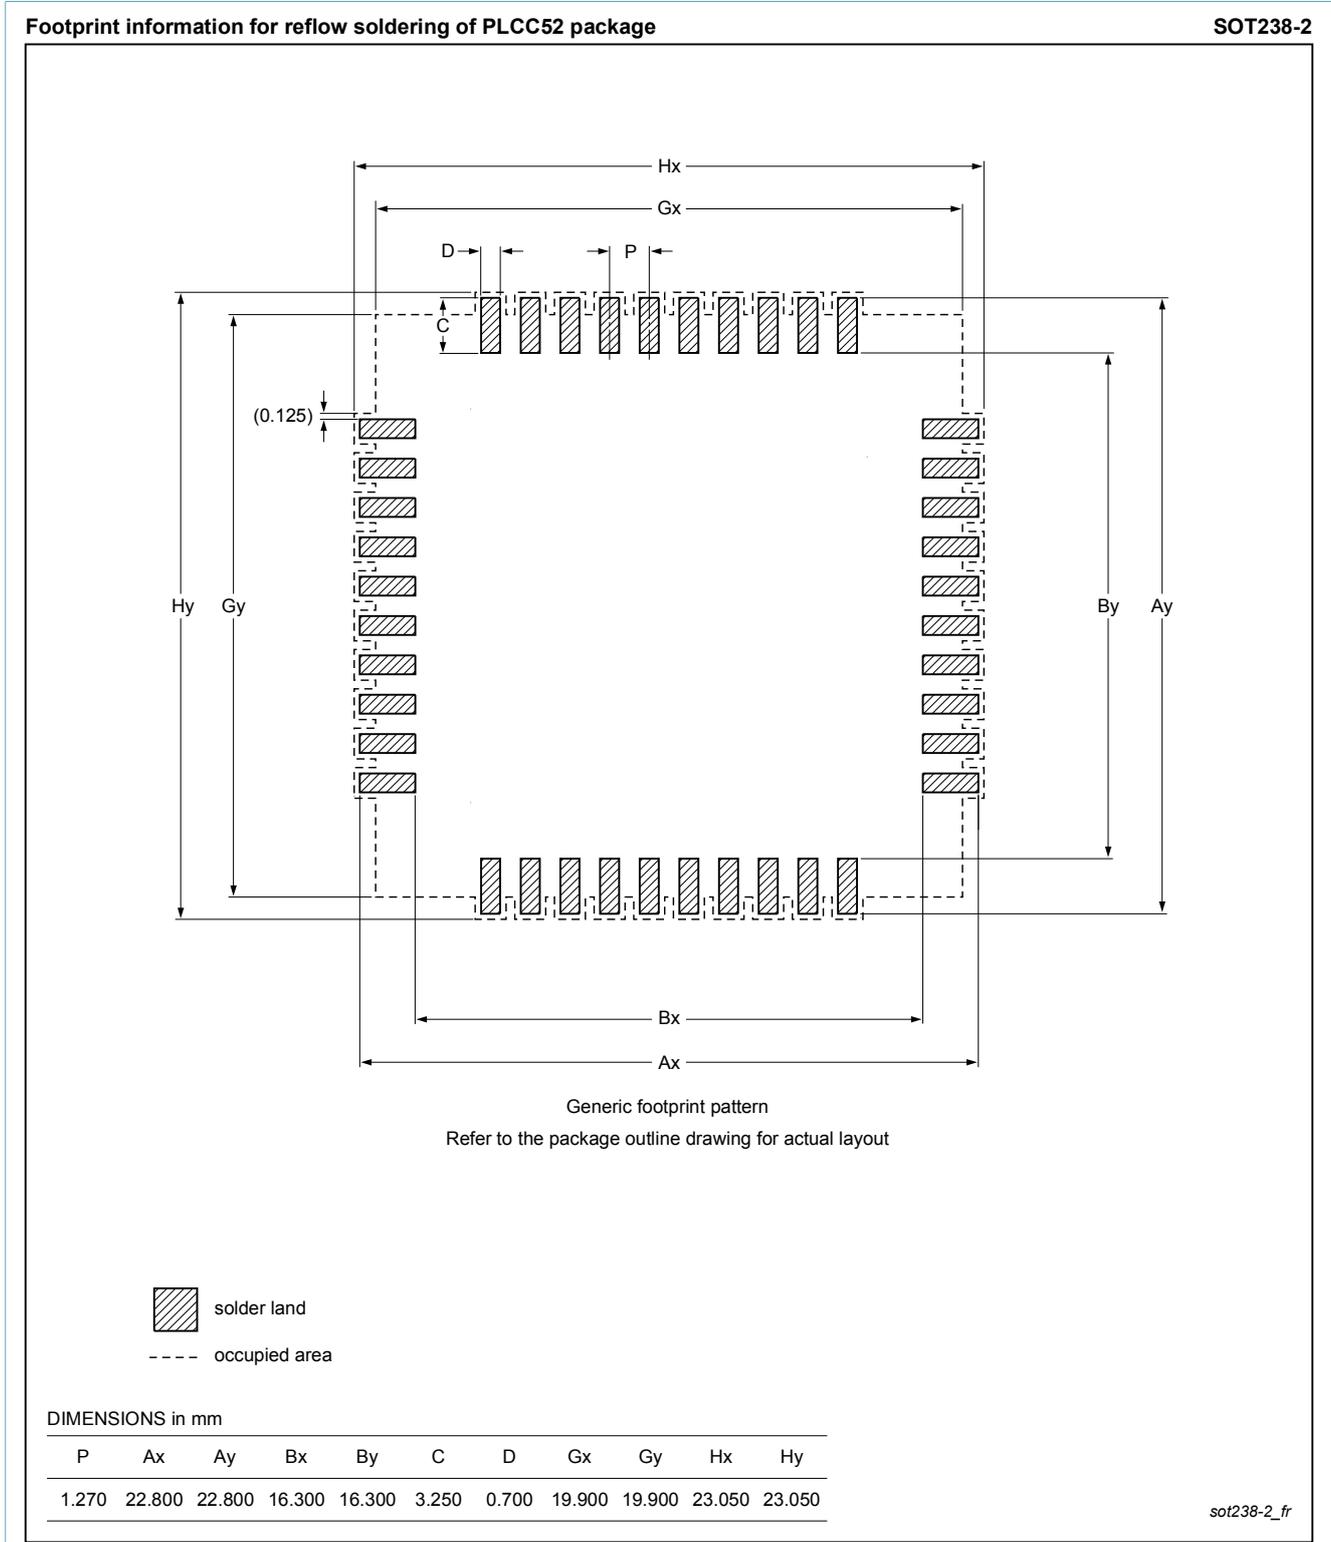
Reflow soldering footprint for PLCC52 (SOT238-2)
